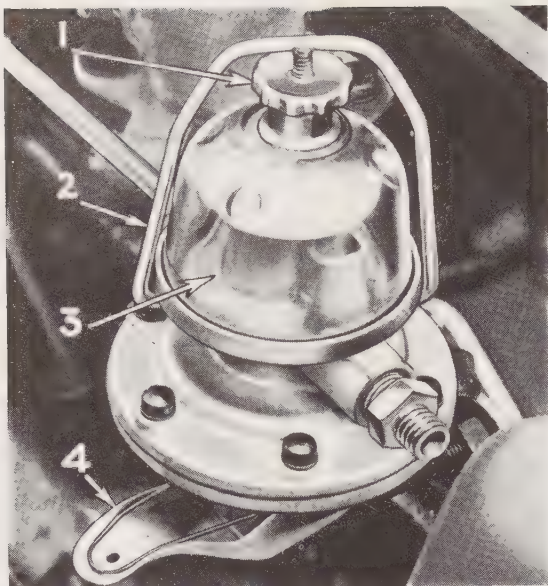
1 Fuel pump in position on 6-cylinder engine.
